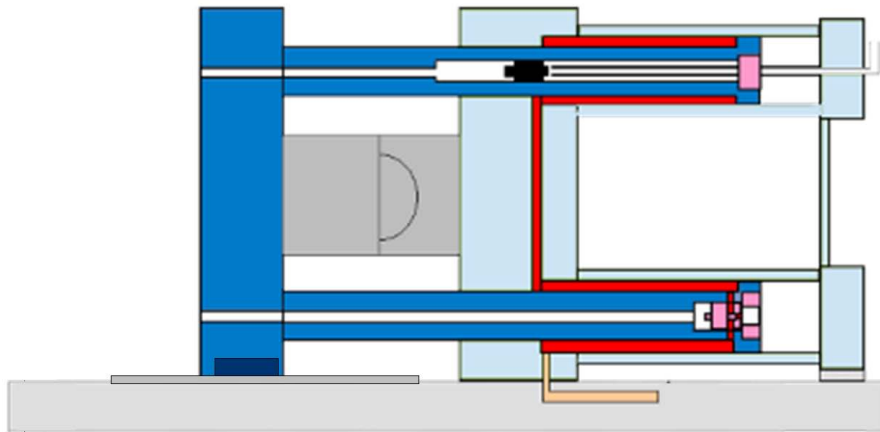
Hydraulic injection moulding machine design KraussMaffei CX series
